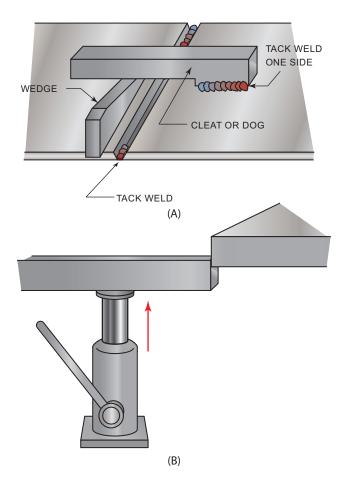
(A) Cleat and wedge used to align parts. (B) Hydraulic jack used to realign a part.
